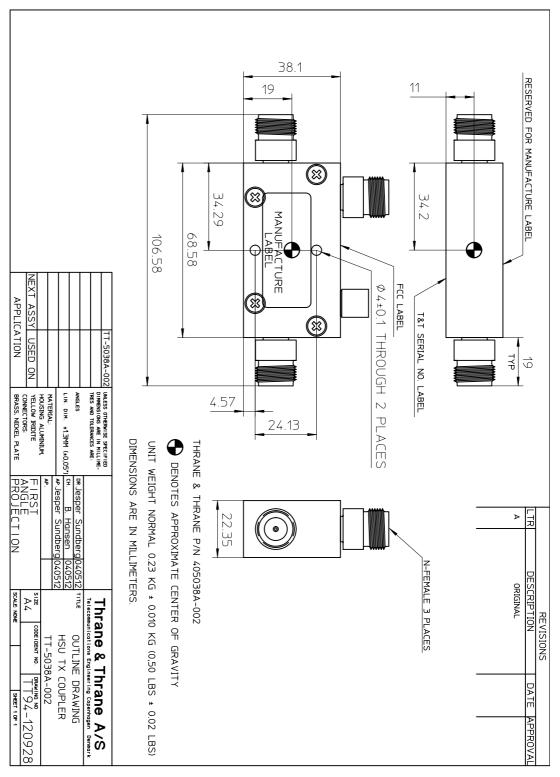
Outline Drawing: Tx Coupler for Optional HSU
